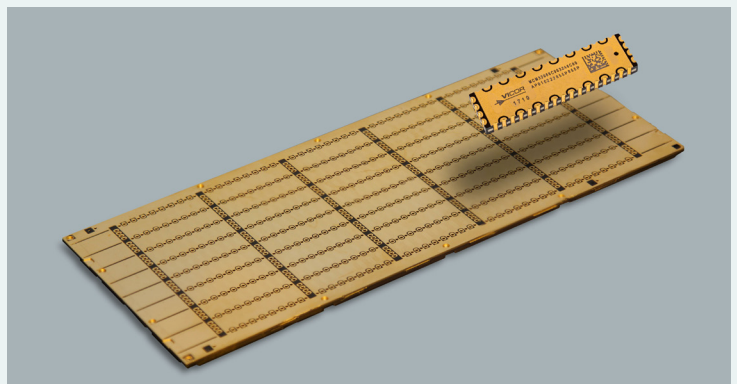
Panel fabrication process enabling configurable CM-ChiP packaging
